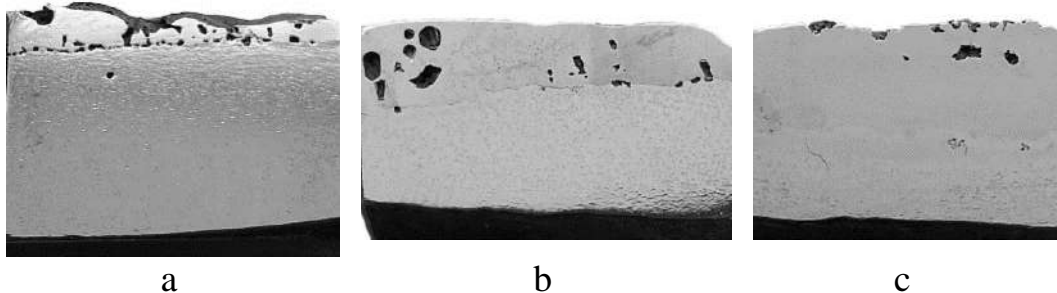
Macrostructure of deposited zones of cracks, a – without introduction of a modifier; b – with modification by a slip casting coating; c – by a modifier with a coating on the electrode
